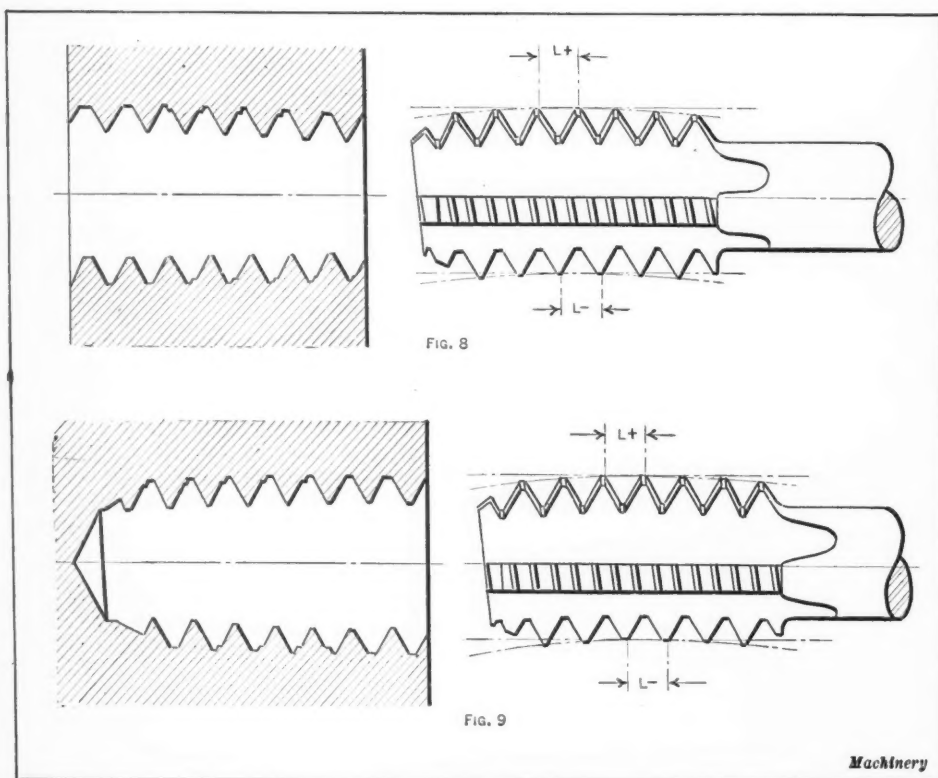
Tap with Threaded Part Bent, but Shank Straight, Tapping a "Through" Hole
